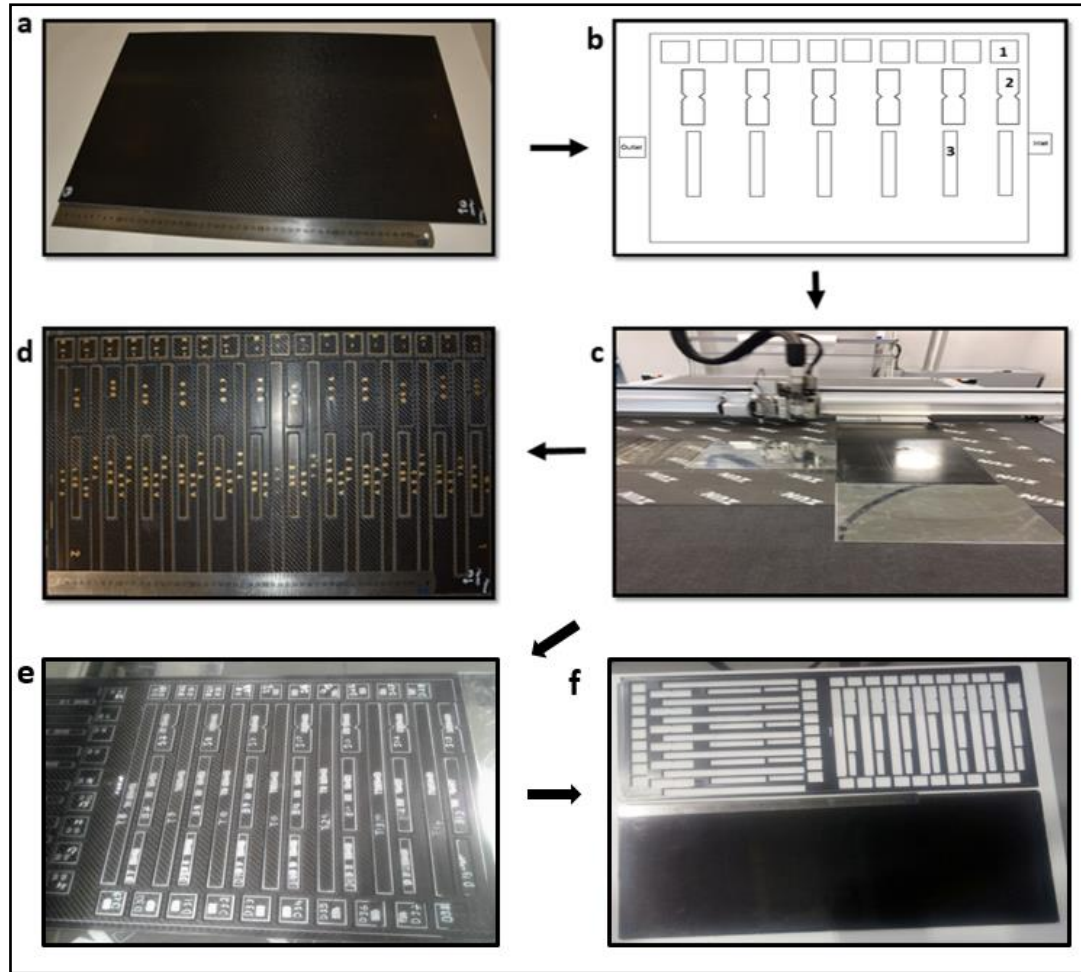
(a) trimmed NT(I) composite plate, (b) scheme of the specimens nesting layout for RTM(I) plates, (c) NT(I) composite plate during specimens cutting in a robotic cutting machine, (d) NT(I) specimens for various experimental tests, cut and ready to be collected from a plate, (e) NT(II) specimens for various experimental test, cut and ready to be collected from the plate, (f) NT(II) plate after collecting the specimens shows two directions of specimens nesting with relative to the injection Port.4.
